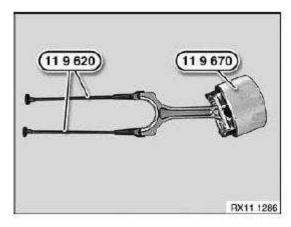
Identifying Special Tool (11 9 620 And 11 9 670) Courtesy of BMW OF NORTH AMERICA, INC.
